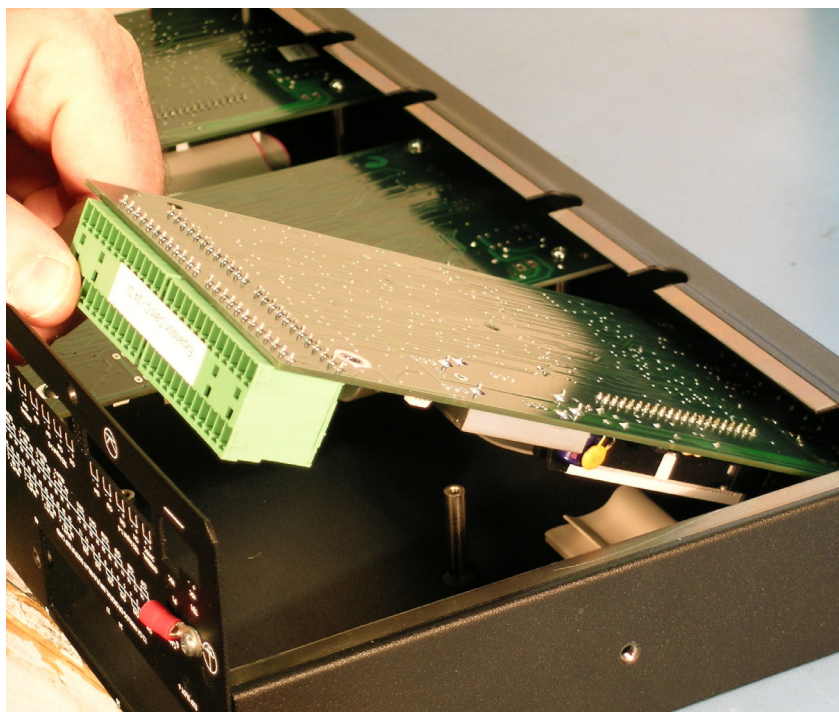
Expansion Card Mounting in a Two-Rack Unit
